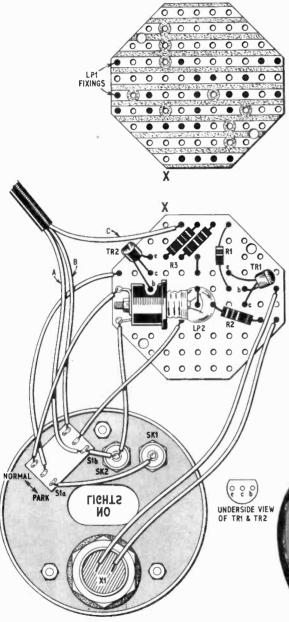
Layout and wiring diagram of the prototype unit housed in a tobacco tin case. This is the negative earth system; for positive earth version the wire connected to SIb wiper is removed and reconnected to SK2, link between SK2 and SIb is removed. Wire "C" is taken to SIb wiper and a new wire—which now becomes "C"—is connected to SK2
